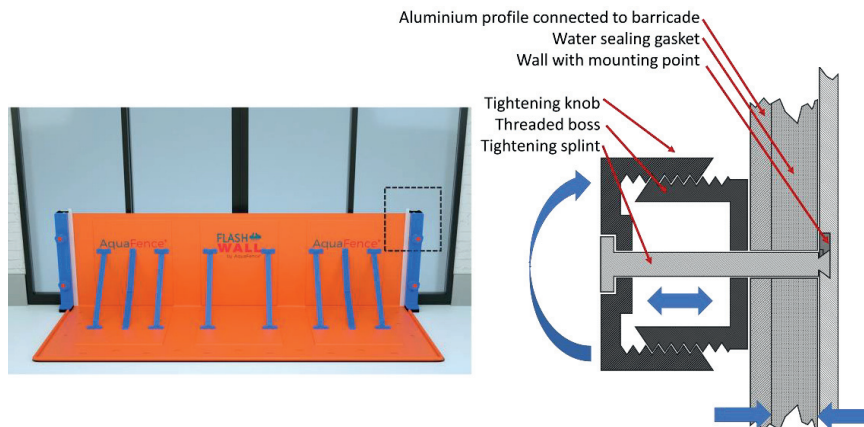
Flood barricade, and conceptual layout of wall connection assembly. Turning the knob makes the knob and boss extend while the gasket gets compressed to make a water tight seal.
